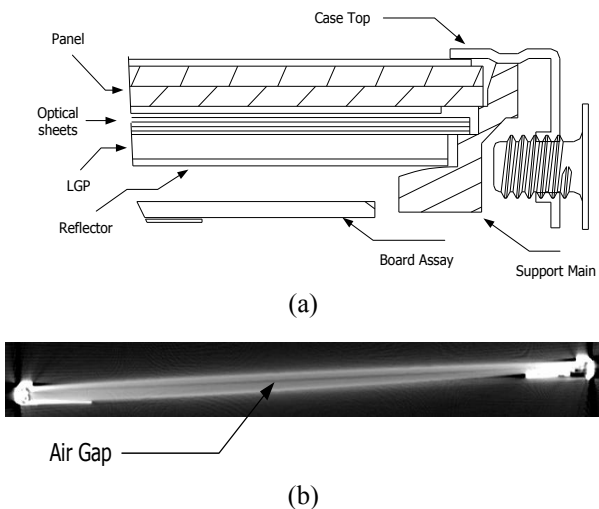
LCD module structure: (a) side section drawing (b) vertical centerline section image (industrial computed tomography image)
